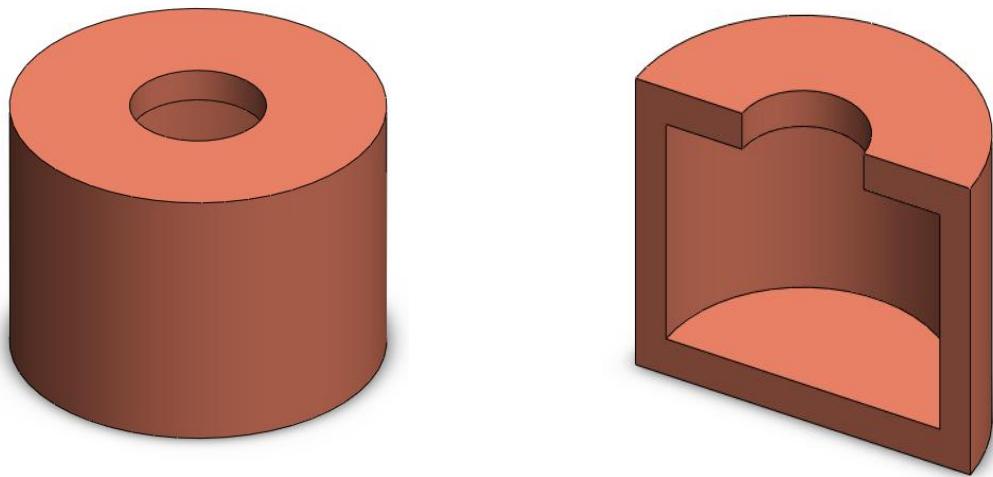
Recessed hole (a) Isometric View (b) Section or, Cutaway view of the hole
